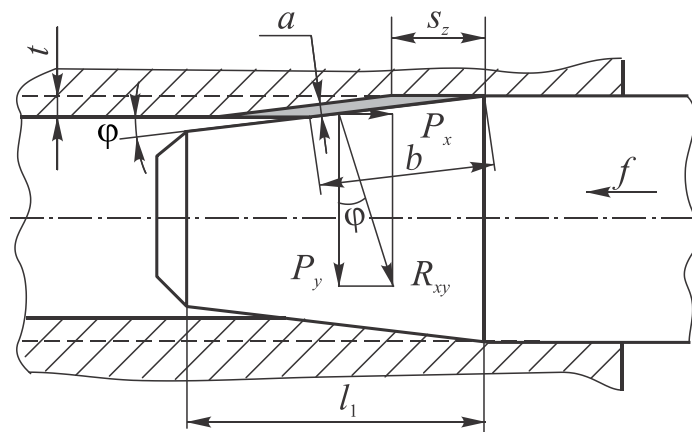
Radial  $P_y$  and axial  $P_x$  cutting force components, and dimensions of the uncut chip in reaming
